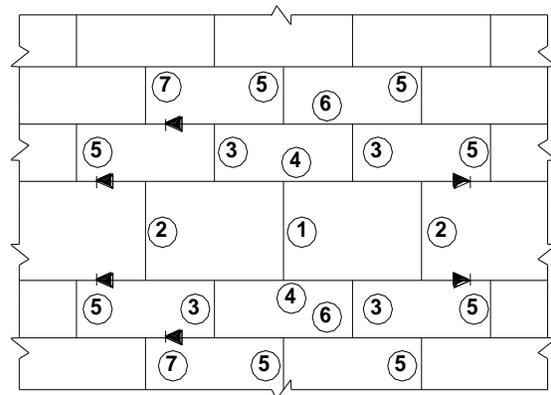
Typical Welding Sequence / Staggered Butts & Seams
